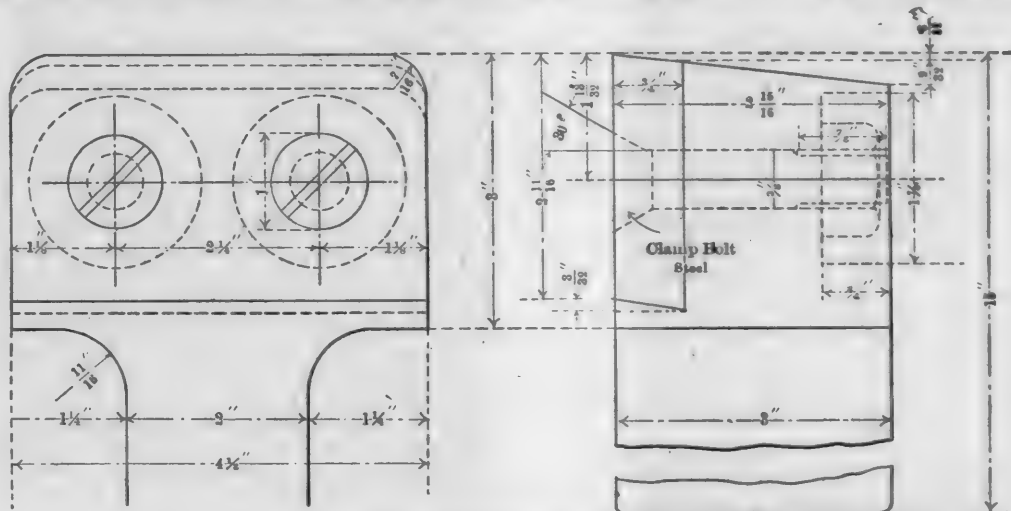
TREAD FINISHING OR SCRAPING TOOL.
